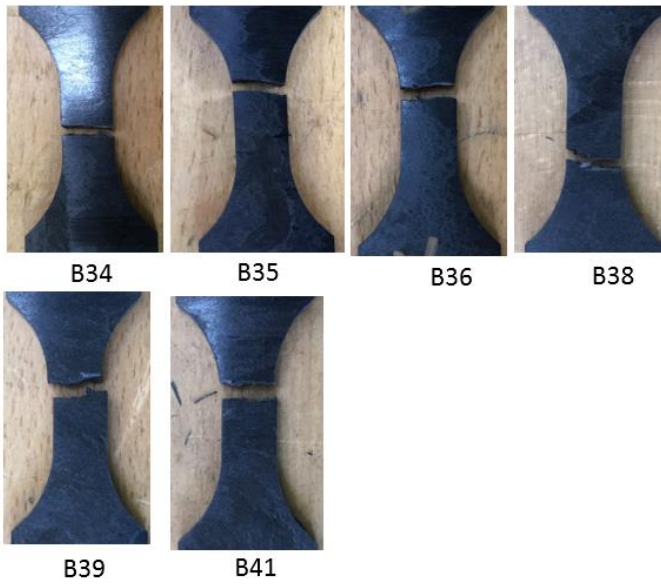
Fracture specimens for 90° coupons at R=0.3.
